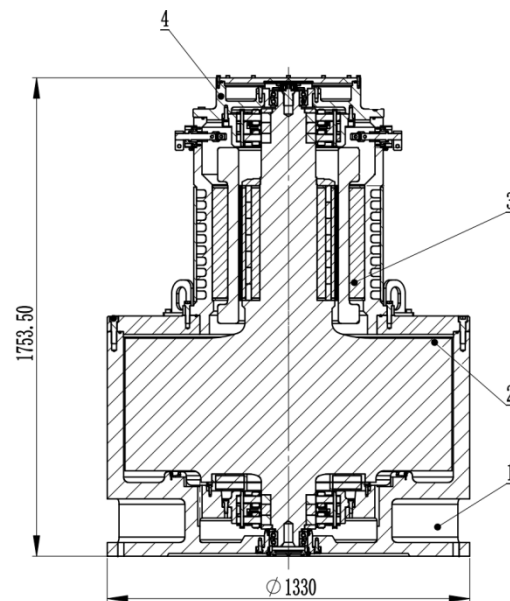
Internal structure diagram of the flywheel. 1. Lower support component; 2. rotor component; 3. motor component; 4. upper support component.
